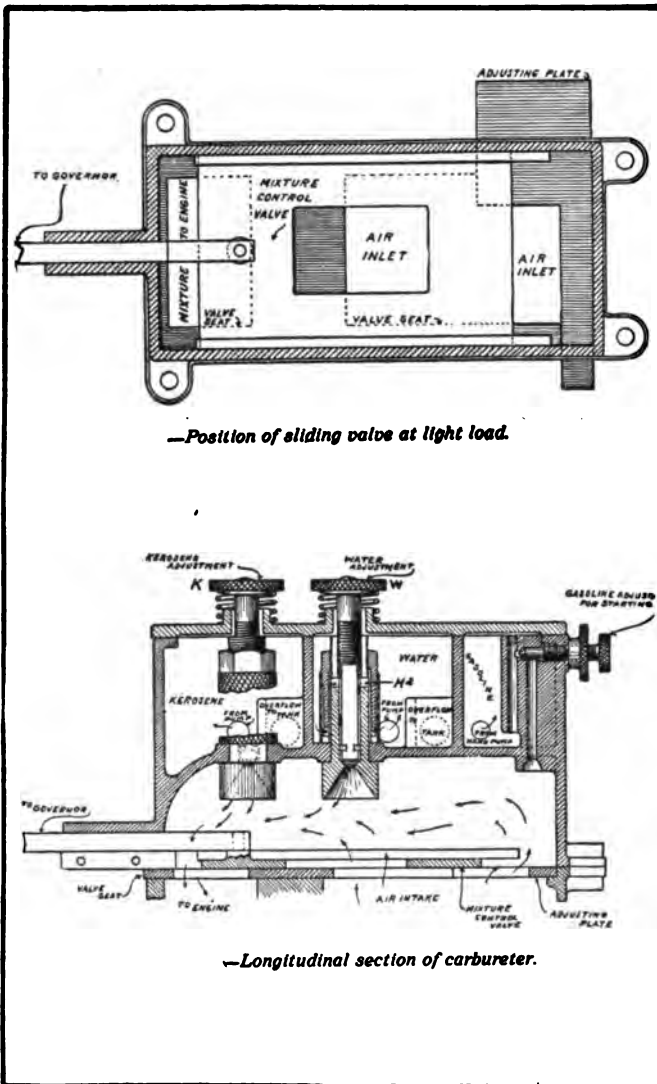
Views of Secor-Higgins carburetor, used on Rumely "Oil Pull" tractors. Position of sliding valve at light load at top, side sectional view of device, showing control device, air, and mixture ports, and fuel and water regulation at bottom.
